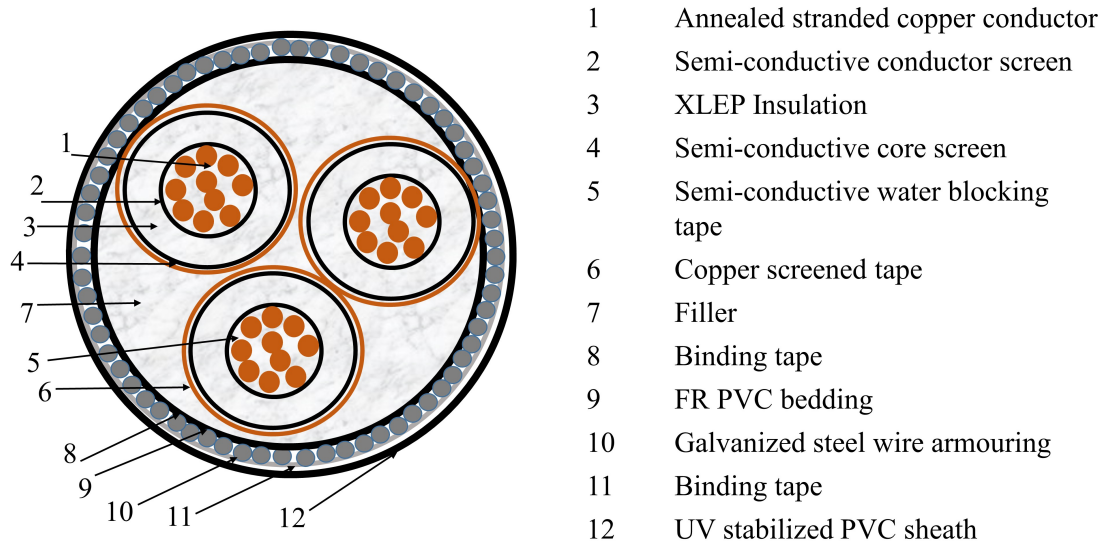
Typical cross-sectional drawing for MV XLPE.
